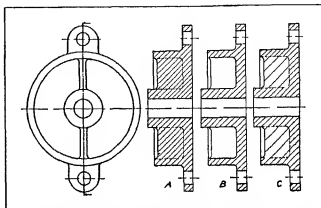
A, TRUE SECTION THROUGH A RIB; B, THE USUAL METHOD OF DRAWING SUCH SECTION; C, AN ALTERNATE METHOD
